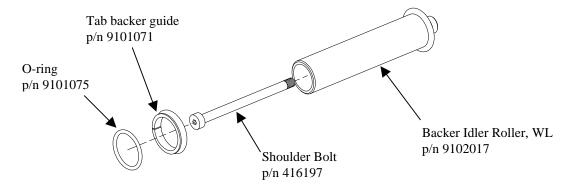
Idler roller assemblies (p/n 9102017A).
